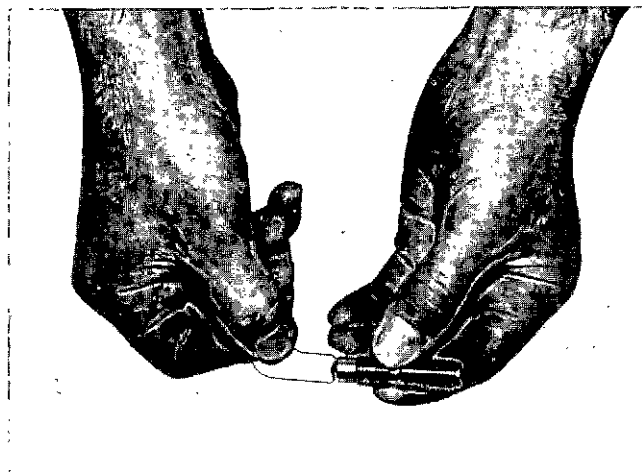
, N20305. Checking rocker lever adjusting screw ball end
